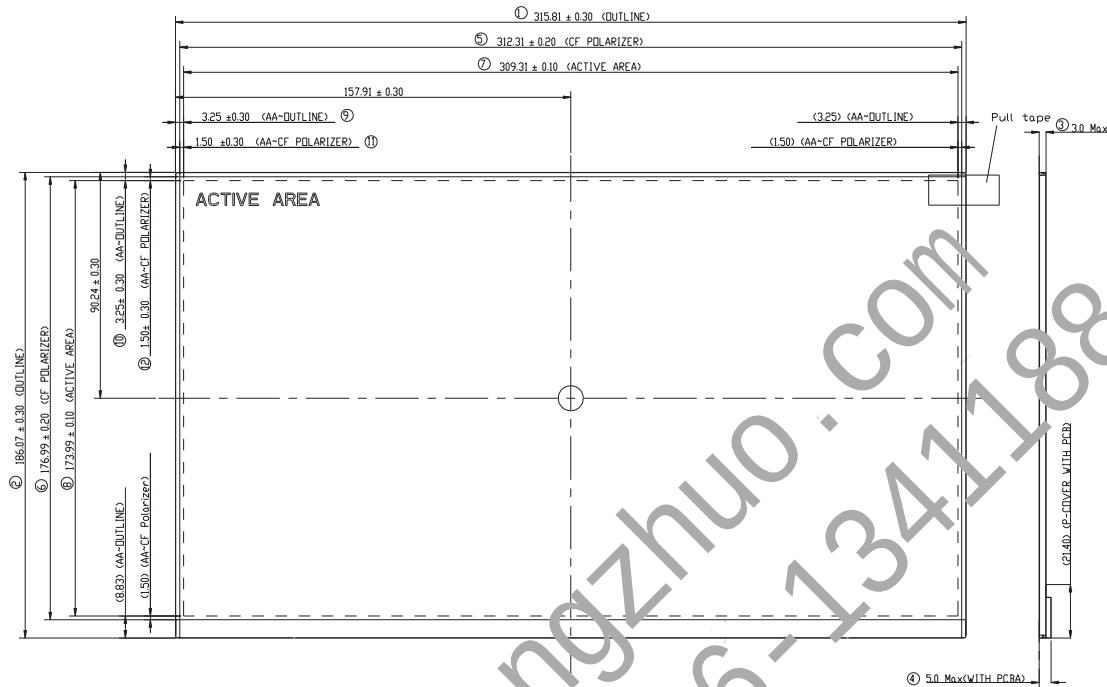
TFT-LCD Module Outline Dimension (Front View)
